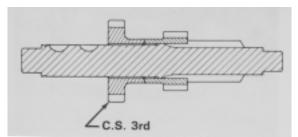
Press 3rd speed gear on countershaft with hub of gear as shown.
